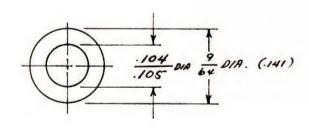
DETAIL: CONNECTOR BAR AFTER FORMING AND FINAL FITTING (MACHINING)
